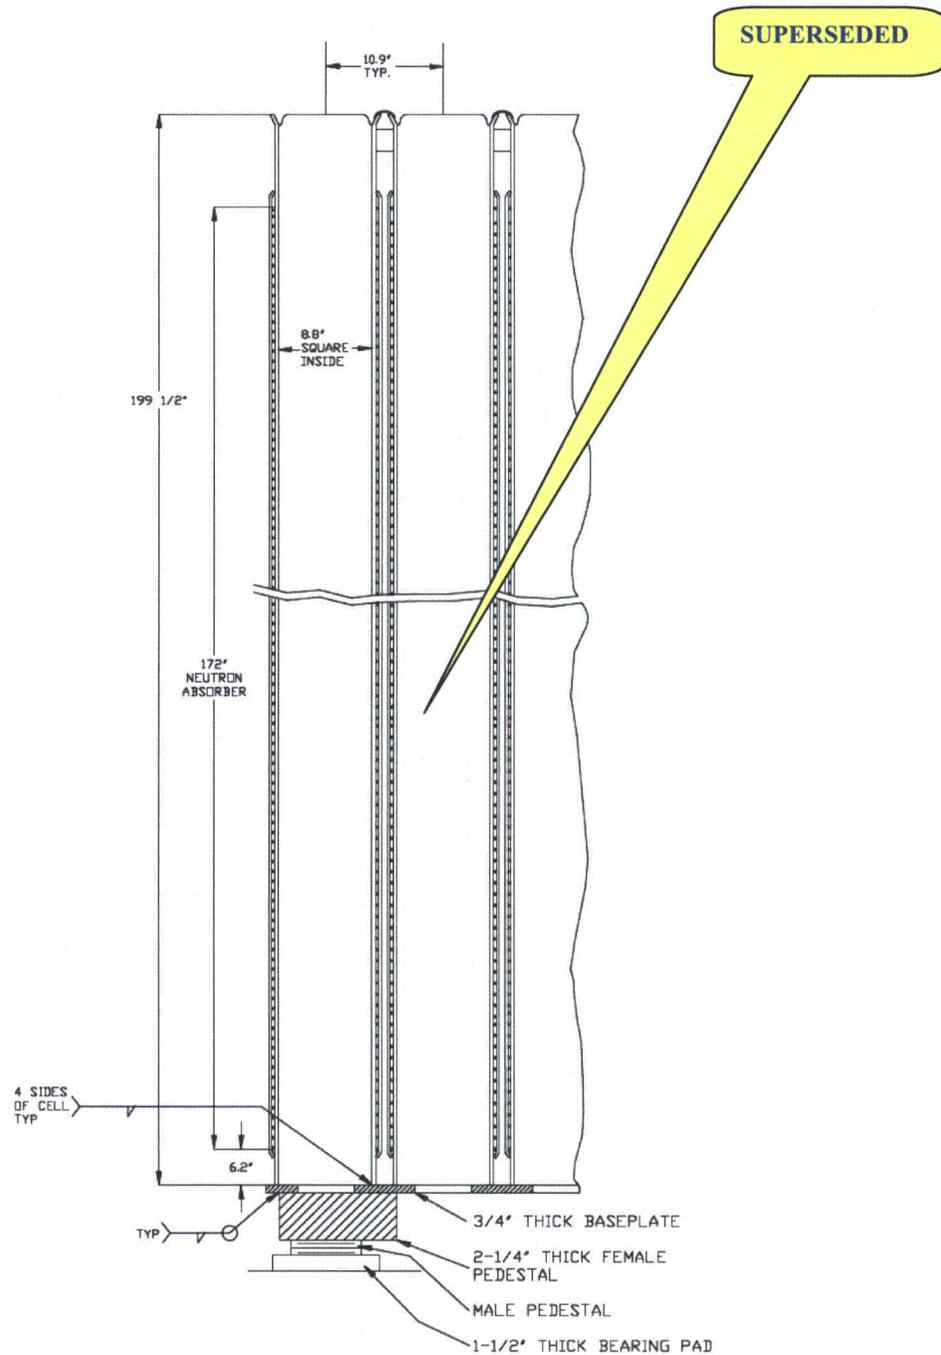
New Fuel Storage Rack Cross Section (Sheet 2 of 2)
